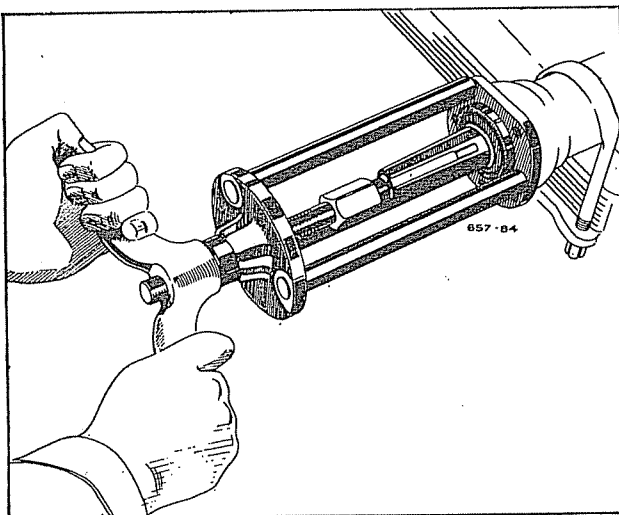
Removing Axle Drive Shaft and Bearing—Tool C-158.
